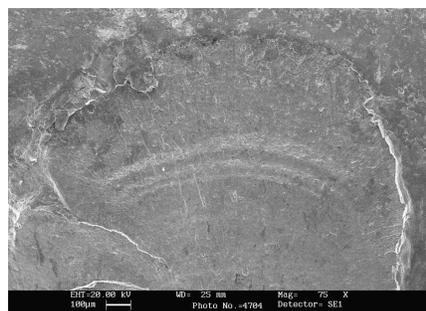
Scanning electron photograph showing beach marks on the spalled surface, typical of fatigue crack propagation
